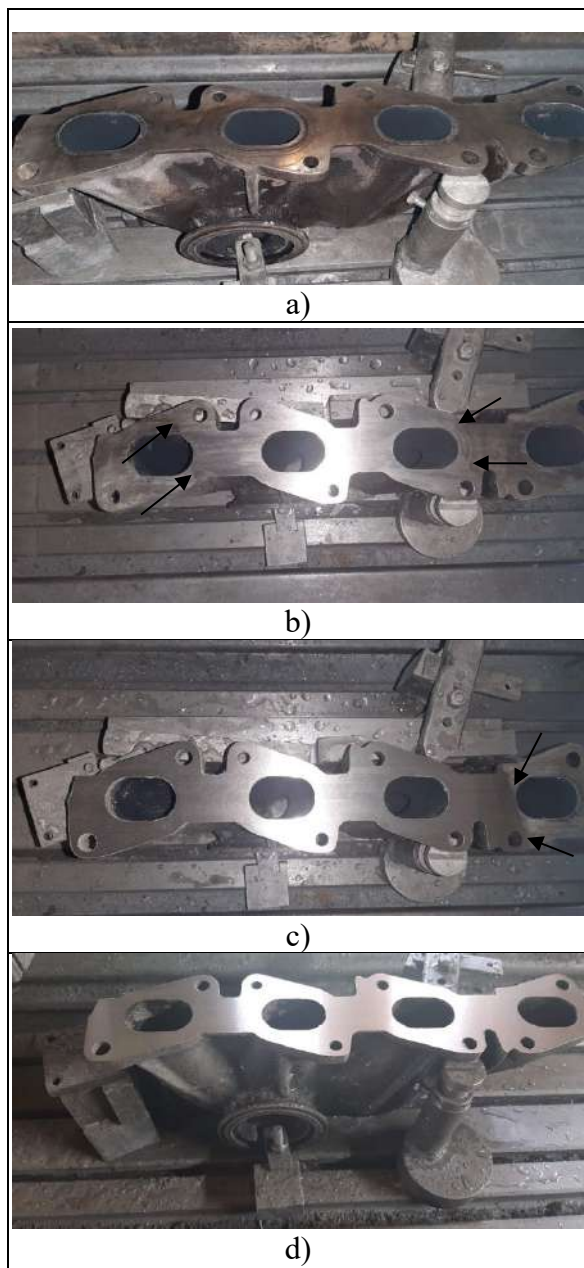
Stages of exhaust manifold grinding: a) based on the table of a grinding machine; b) after
